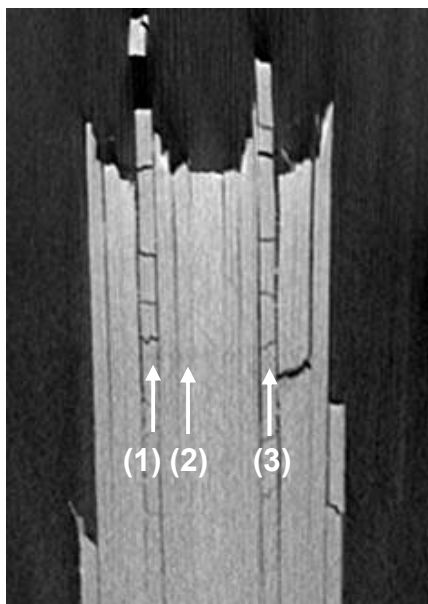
CT Cross-Sectional Images of the Fracture Area
